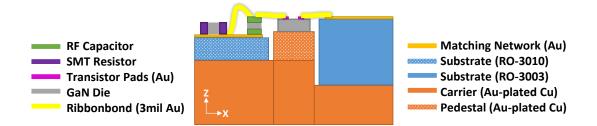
Assembly diagram showing multi-level carrier with integrated pedestal
